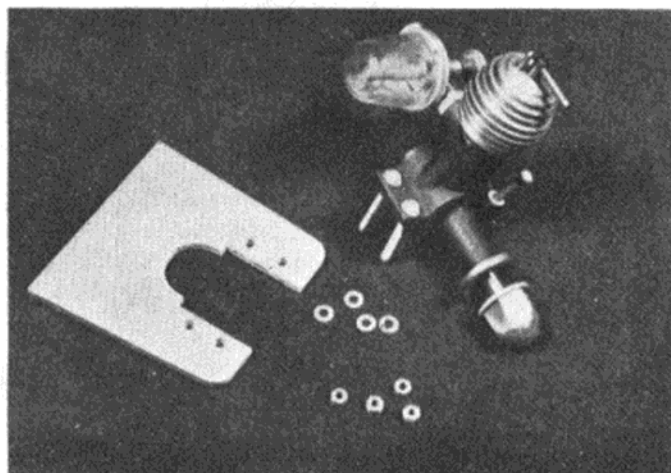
Trim the engine mounting plate to fit the engine to be used and drill mounting holes accurately.
